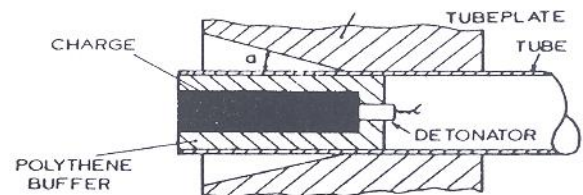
Inclined tube to tube plate welding geometry.
